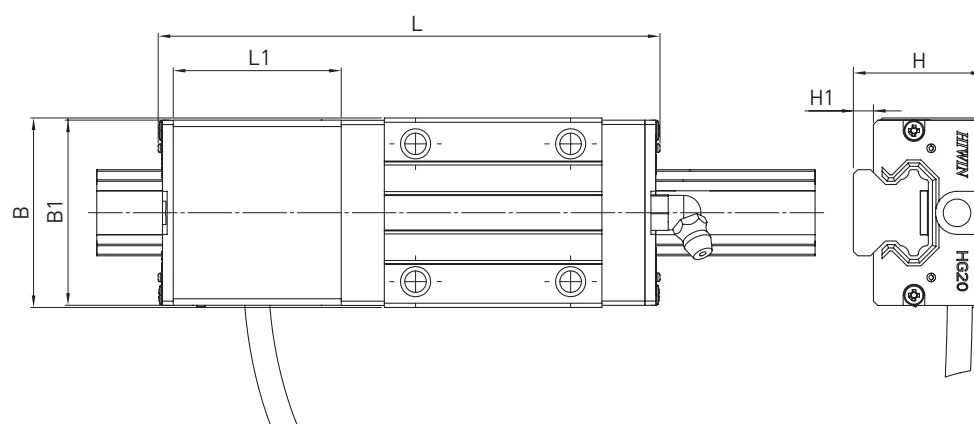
Scale drawing of the HG20CA block including the MAGIC-PG housing
